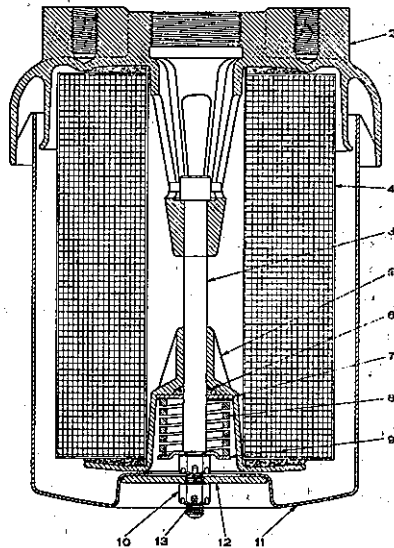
Sectional Assembly View of the Type "L" Air Filter
